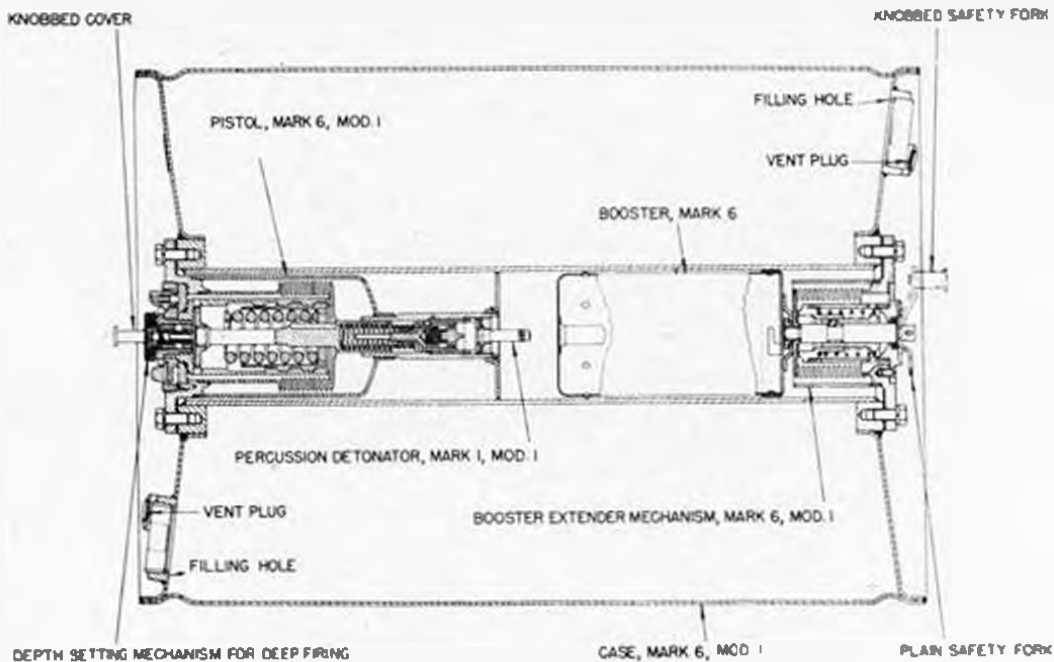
Mk. 6-1 Depth Charge, Sectional View
